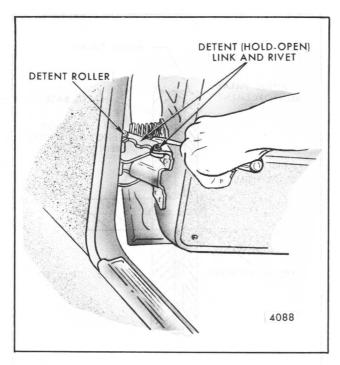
Front Door Hinge "Hold-Open Spring" Removal - "X" Styles
